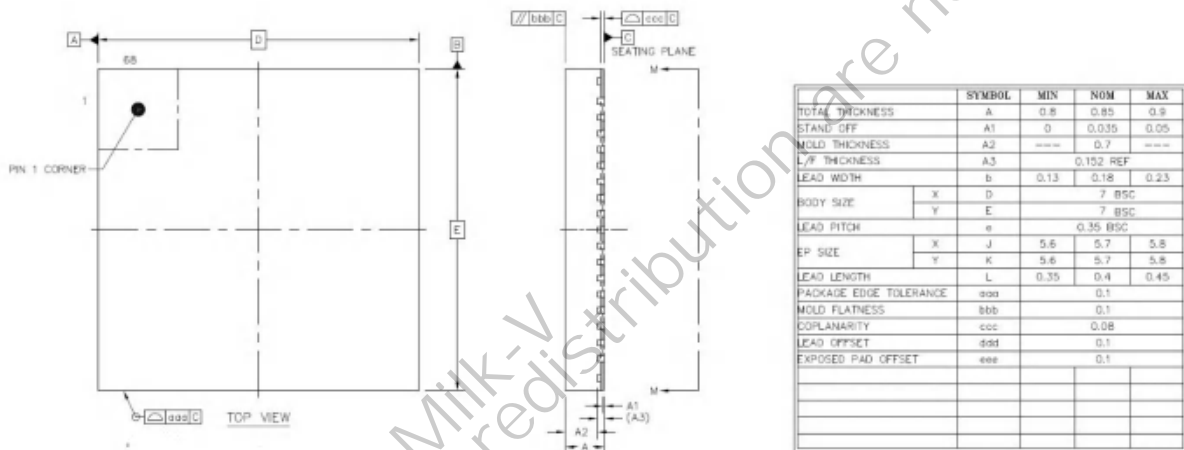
CV180ZB/CV1800B/CV1801B package dimensions, top view
